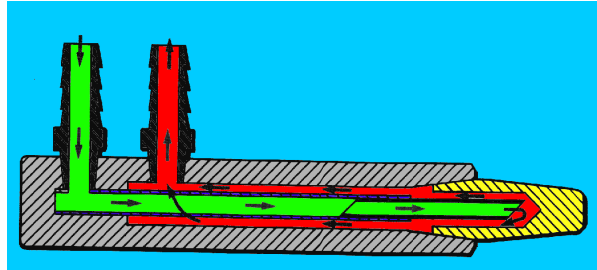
HEAT REMOVAL FROM ELECTRODE HOLDER
